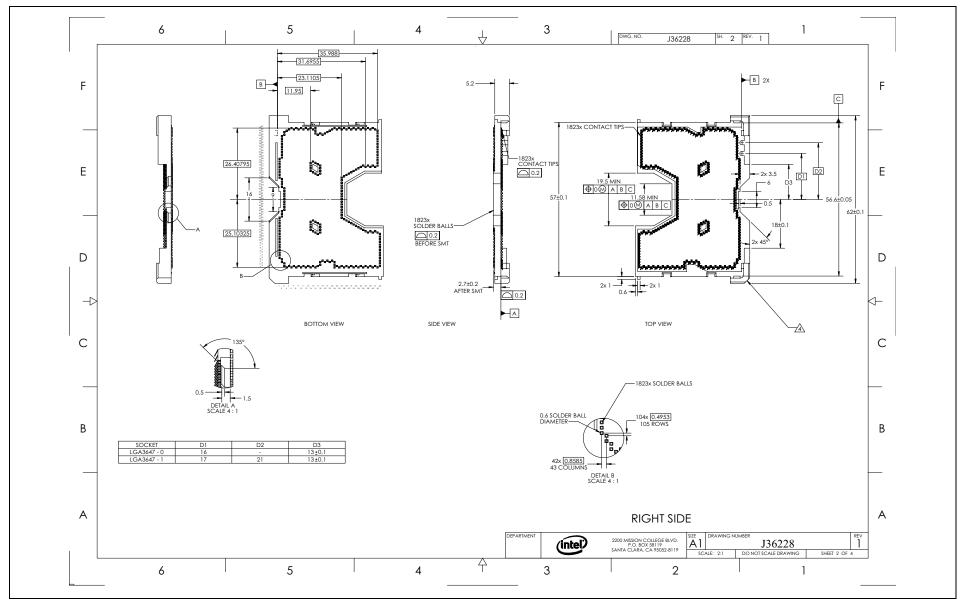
Socket Mechanical Drawing (Sheet 3 of 4)
